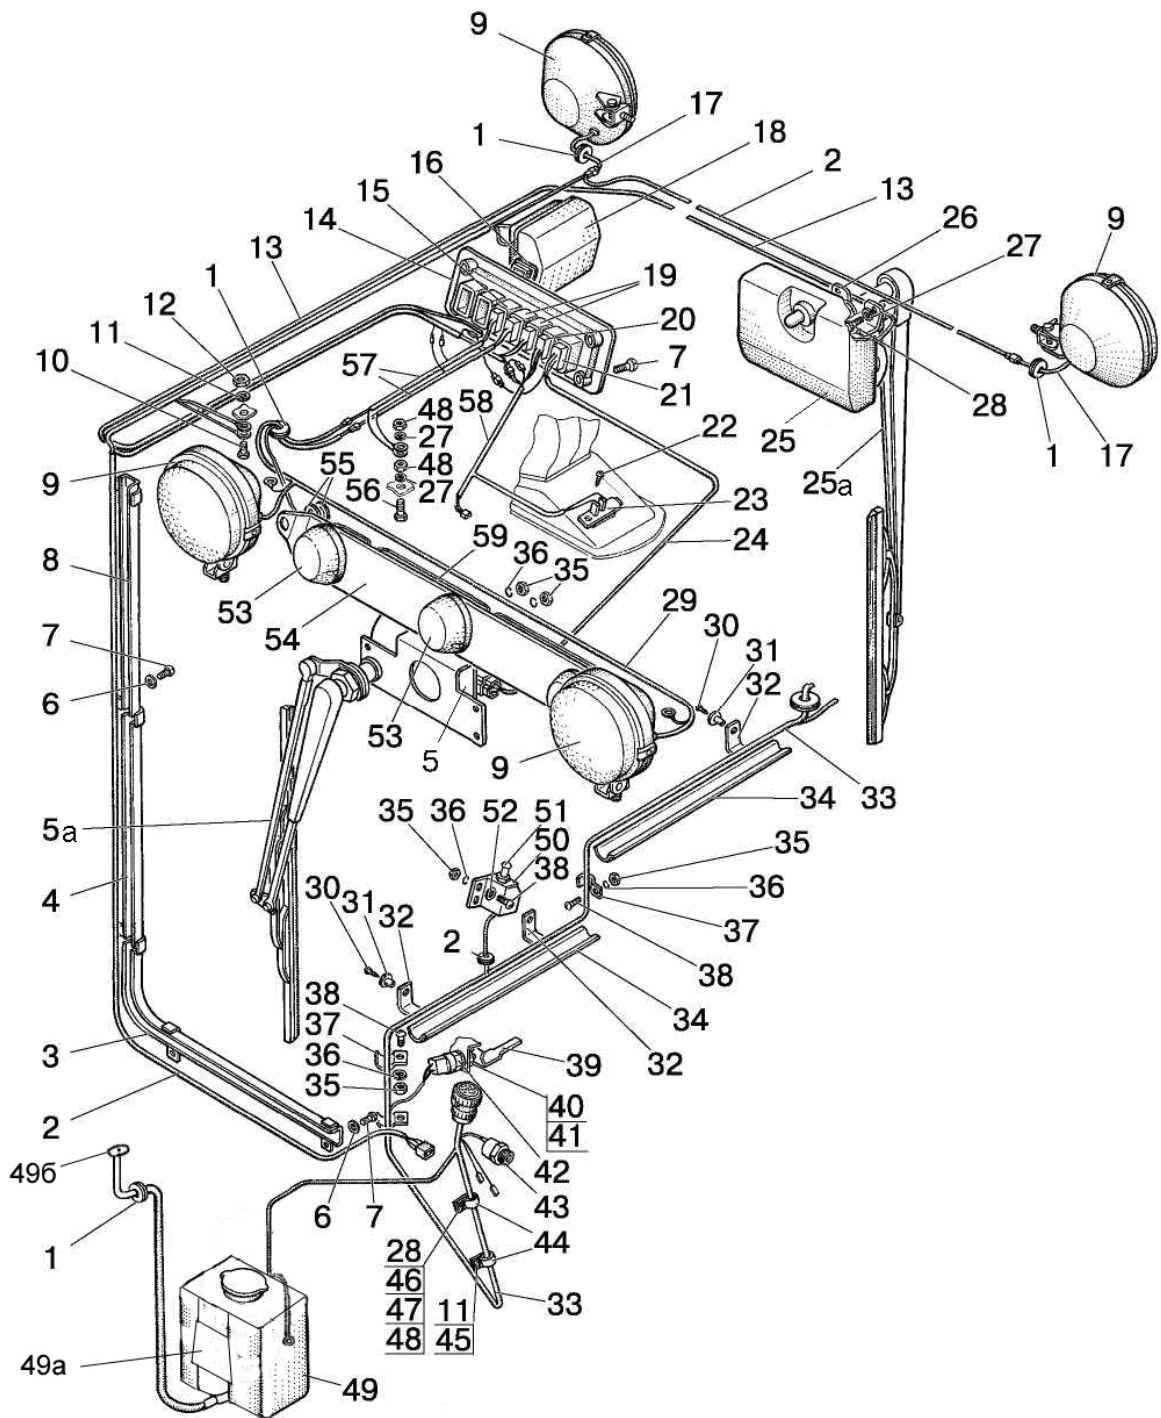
Electrical equipment of cabin. Working lamps and rearlights.
